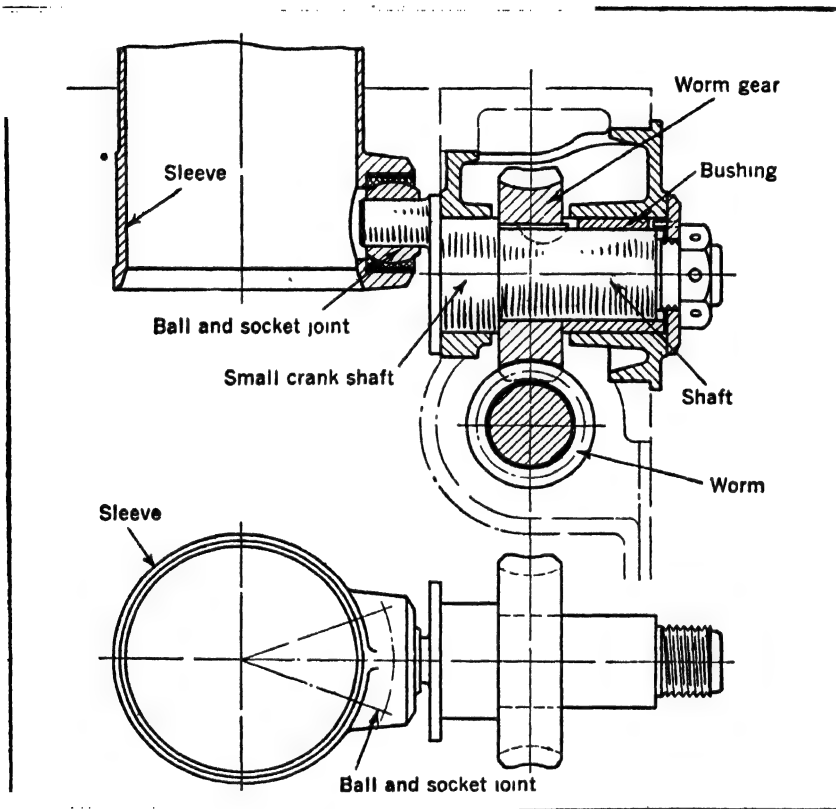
B.—Method of Actuating Single Sleeve Valve by Gear Actuated Crank and Ball and Socket Joint.
